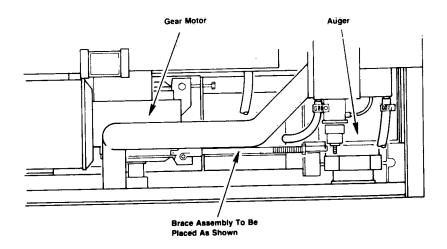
, INSTALLATION OF BRACE ASSEMBLY.
